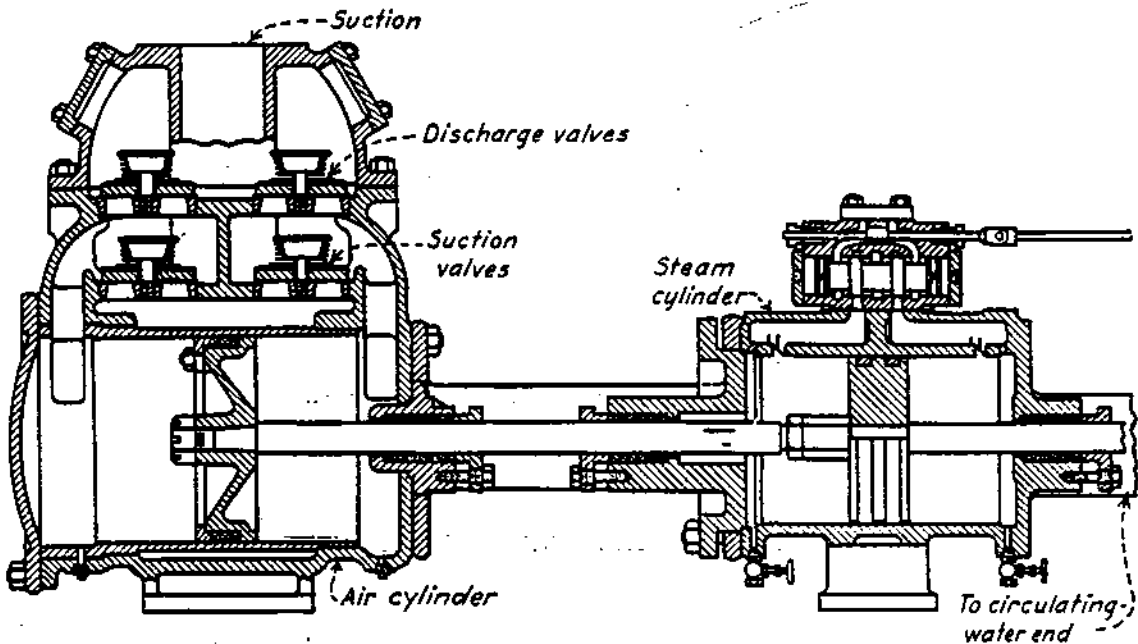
Horizontal simplex wet-vacuum pump, usually built as a combined vacuum and condenser circulating pump driven by a single steam cylinder.
